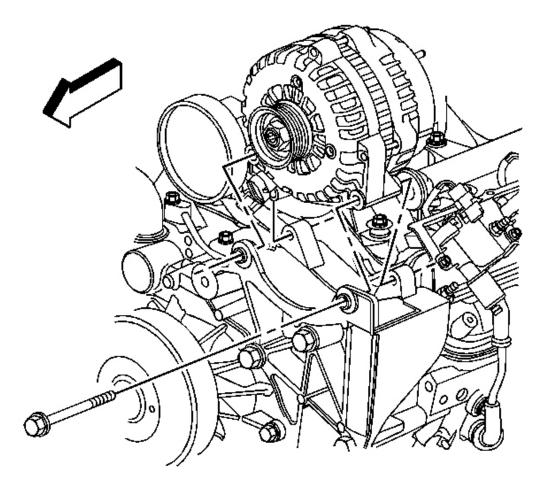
View Of Generator & Bolts (5.3L) Courtesy of GENERAL MOTORS CORP.
